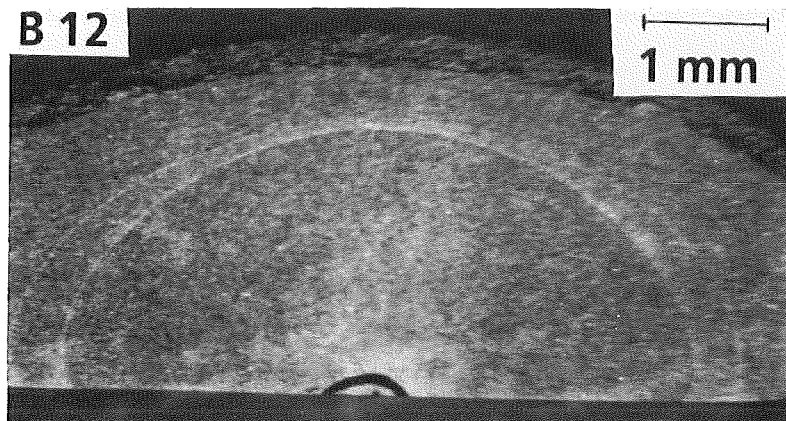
Fractured surface of the fatigue loaded 316 LN cold drawn material with semi circular and semi elliptical markers
